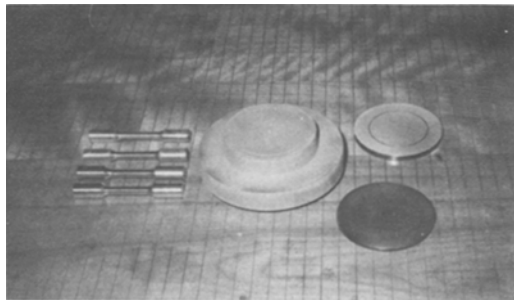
Photograph showing an aluminium-matrix composite in the as-forged condition with sections removed and machined from a similar part for wear and tensile tests.
